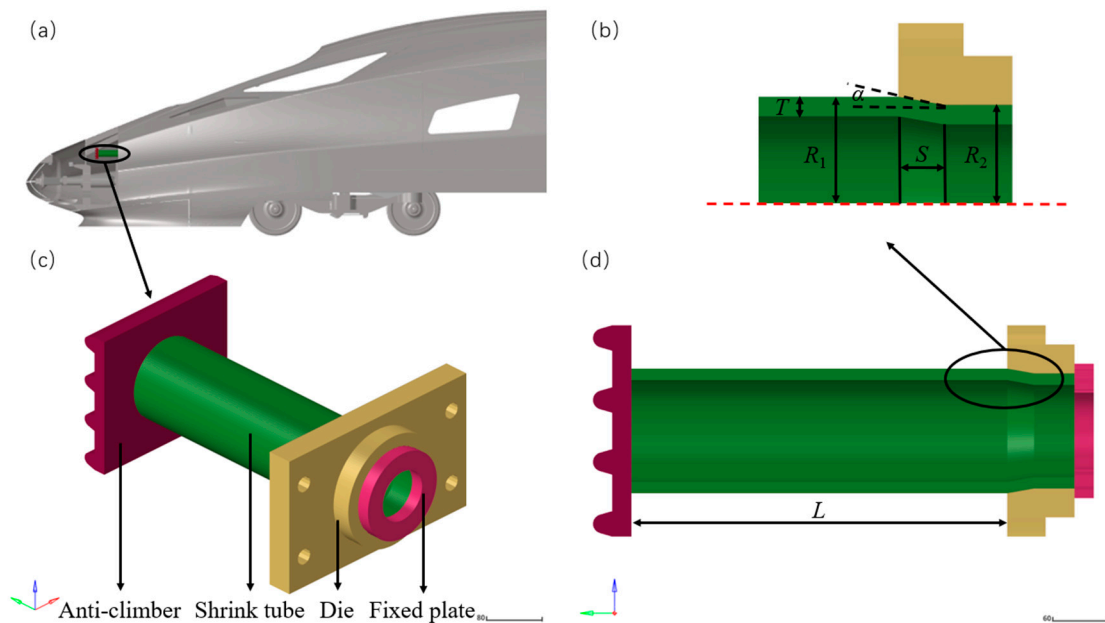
Structure description of the shrink tube anti-climb device: (a) installation diagram; (b) size detail drawing; (c) axonometric drawing; (d) semi-sectional view.
